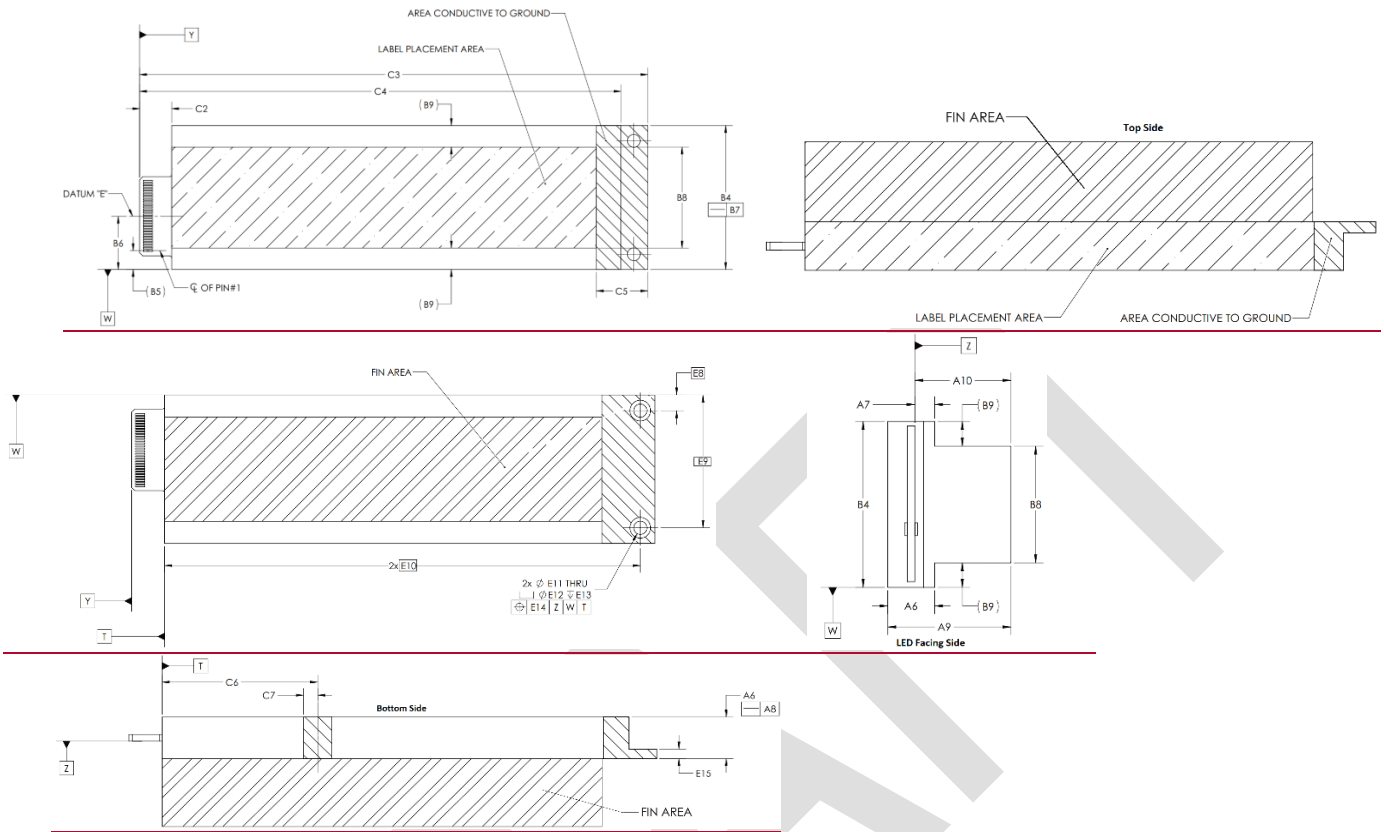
1U Short Form Factor drawing with Optional Asymmetric Enclosure (25W)
